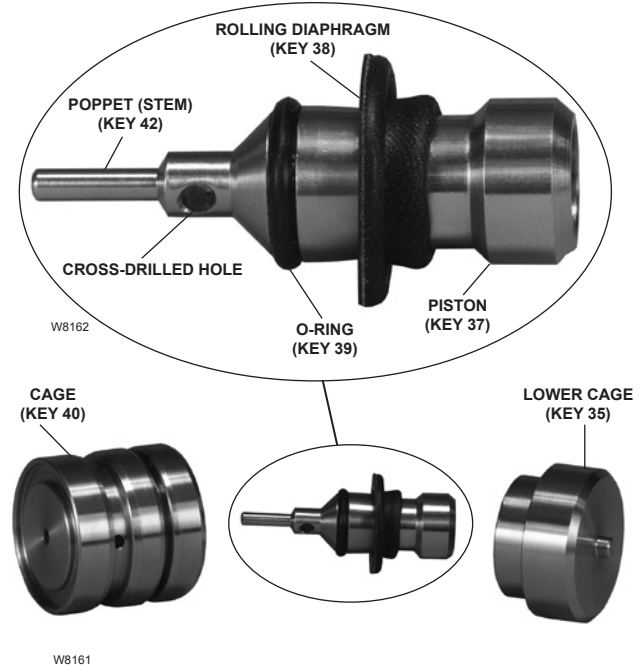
NPS 1 and 2 / DN 25 and 50 Pad Valve Cage Assembly
